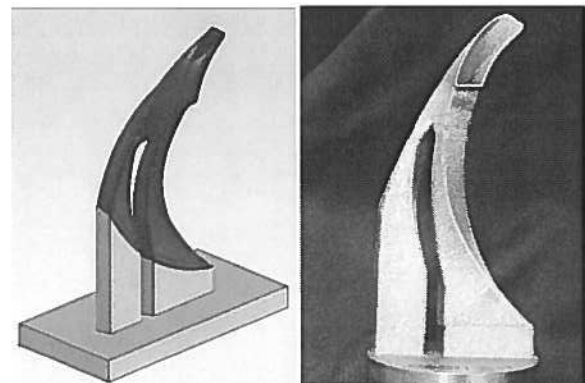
Vane passage segment of an impeller, (a) CAD drawing, and (b) LC Ti-6Al-4V part.
